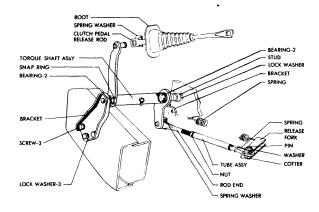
Clutch Linkage (Showing Relationship of Parts)
